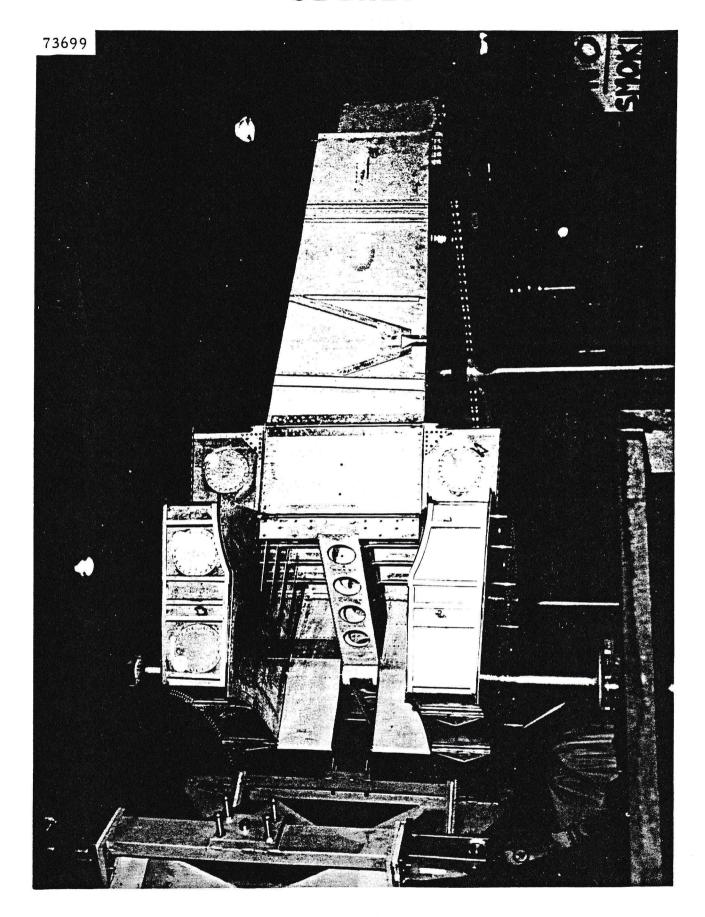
INNER WING ASSEMBLY-60° AIRFRAME SEGMENT
